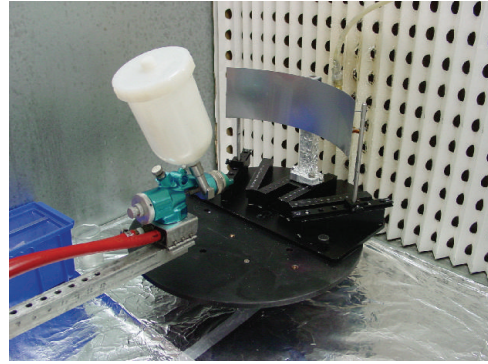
Epoxy coating of a foil using a robotic sprayer.
